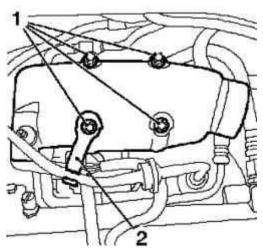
Mounting pipe deflection air pressurization: 1 - mounting screws, 2 - Bracket
